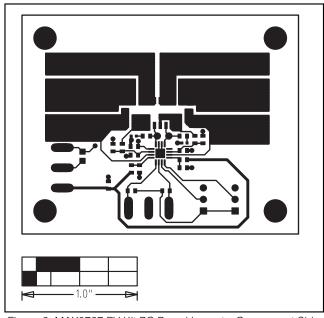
MAX8737 EV Kit PC Board Layout—Component Side
